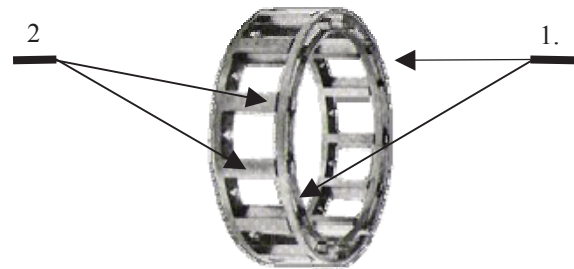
View of investigated bearing cage of the turbine engine: 1 – rings of cage, 2 – separation elements
